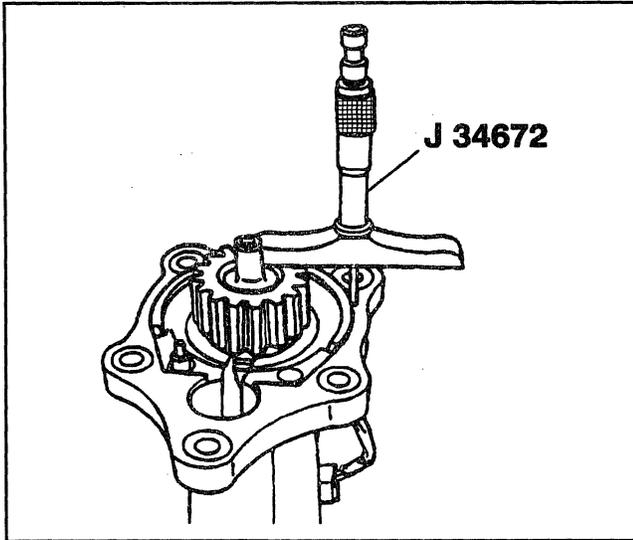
Measuring to Calculate Shim Size-Dimension "A"
